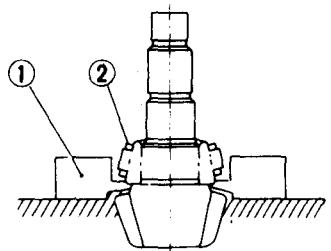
Removal of drive pinion rear bearing cup
